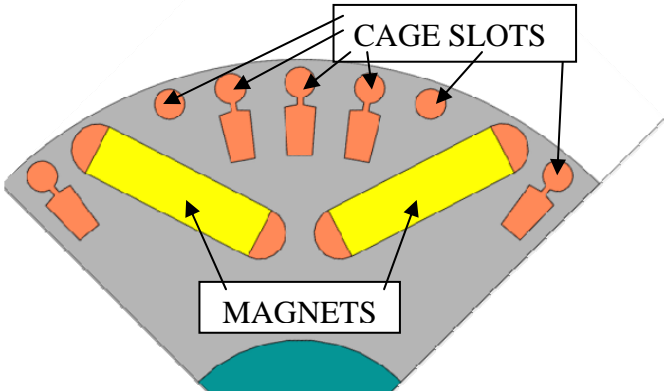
Rotor magnet and cage pattern for many of the motors tested in this project
